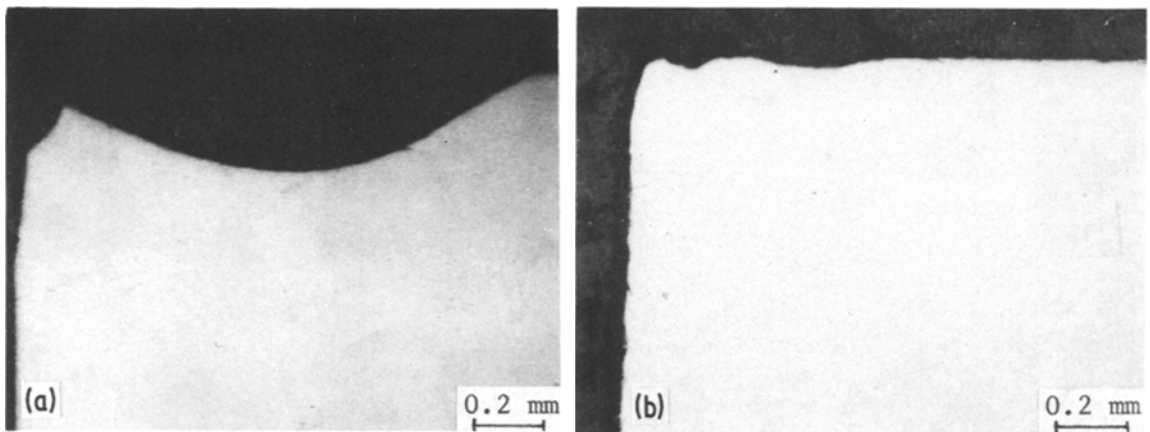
Typical cross-sections of uncoated and coated tools. (a) Uncoated tool; (b) TiC-coated tool.
